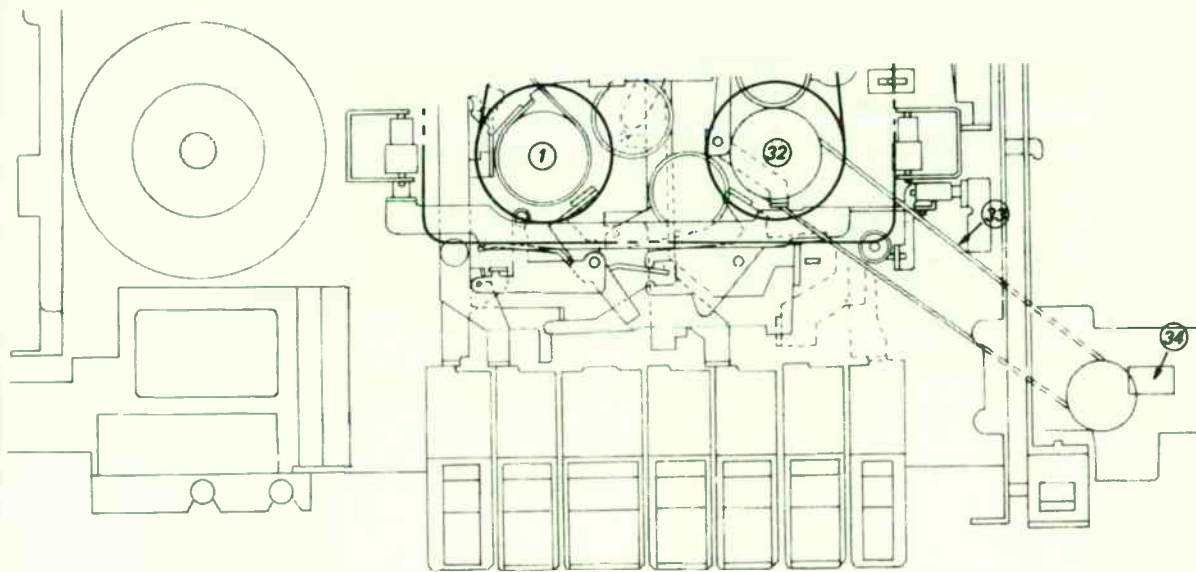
Illustration of the path taken by the tape threading and the drum head assembly.
